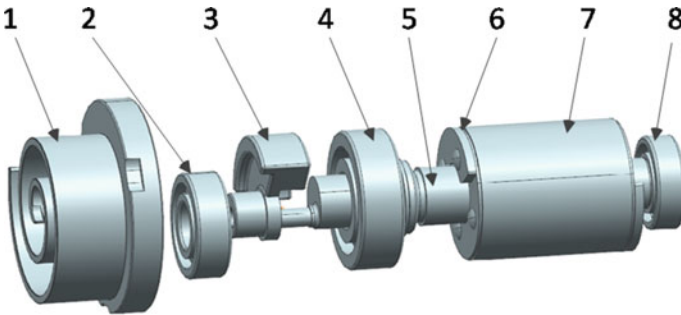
Rotor structure of scroll compressor. 1. Orbiter, 2. scroll disk bearing, 3. eccentric sleeve, 4. main bearing, 5. principal axis, 6. small counter-weight, 7. motor rotor, 8. counter shaft bearing
